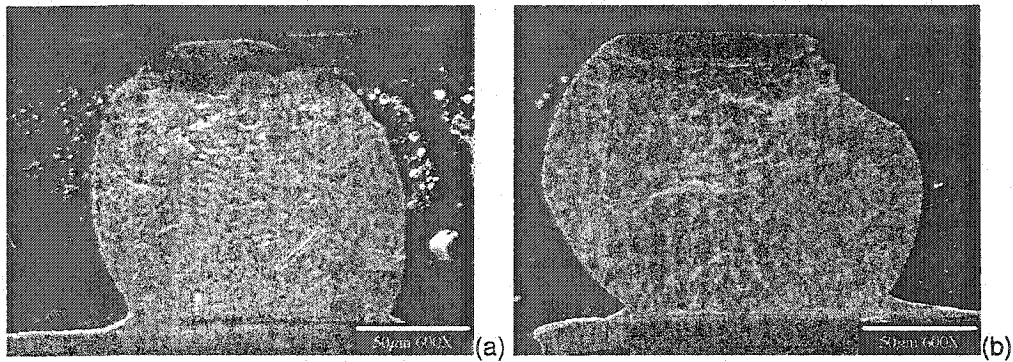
Secondary SEM of (a) solder joint A ($0.72 \times 10^4 A/cm^2$) (b) solder joint B ($0.73 \times 10^4 A/cm^2$) on Module #42 after 129 hrs 1A stressing
